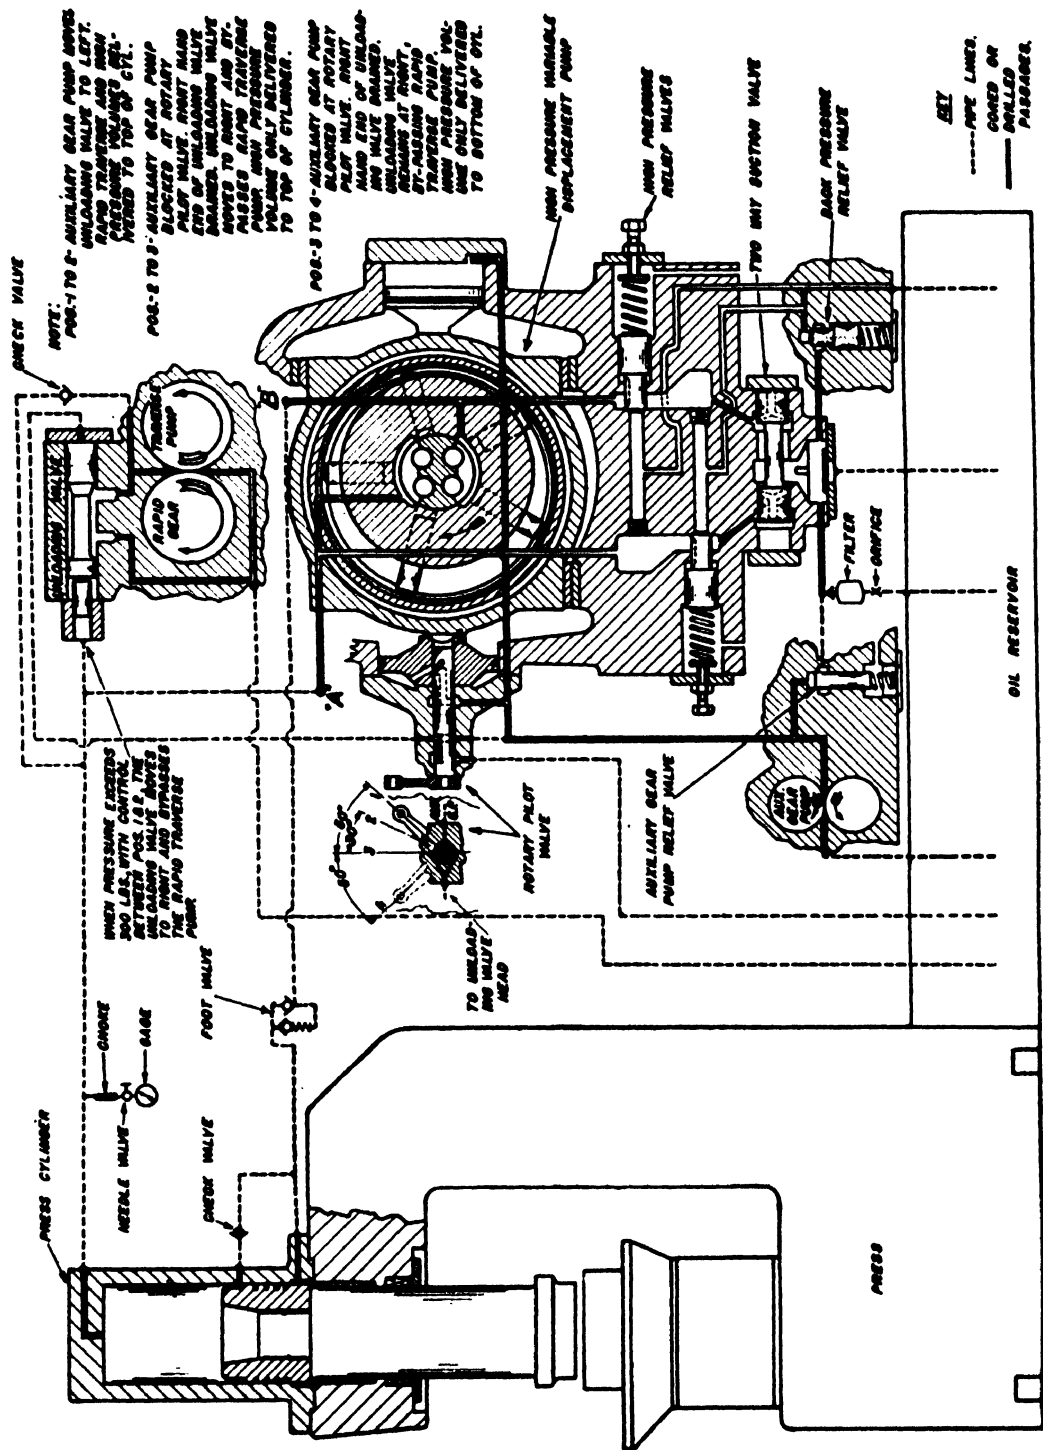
Oil circuit of Oilgear press. (The Oilgear Co., Milwaukee, Wis.)
